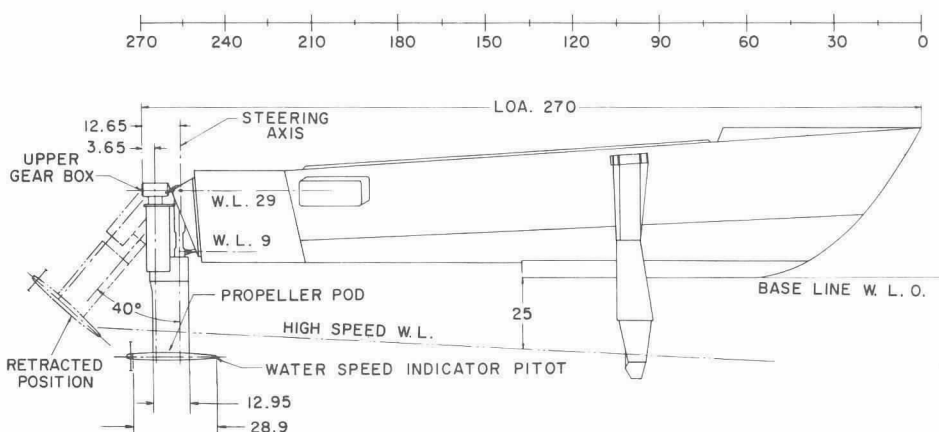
Side view of the ONR supercavitating hydrofoil boat (all dimensions in inches)
